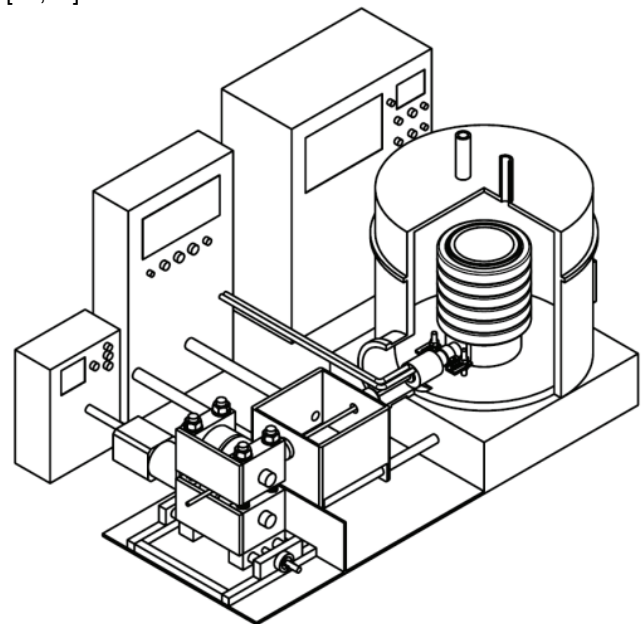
Apparatus for continuous casting in schematic perspective view – own design DCC-AGH[®] [13]
